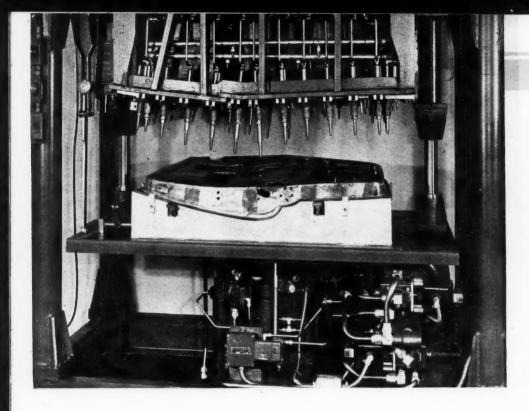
Automobile Doors are Assembled on This Automatic Welding Press at the Rate of 400 per Hour by Making Sixty Simultaneous Spot-welds
